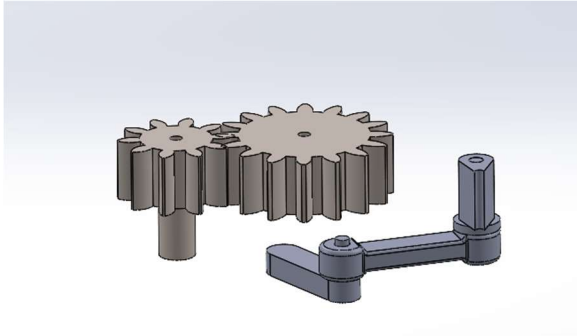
Gear and Linkage Demonstration SOLIDWORKS
